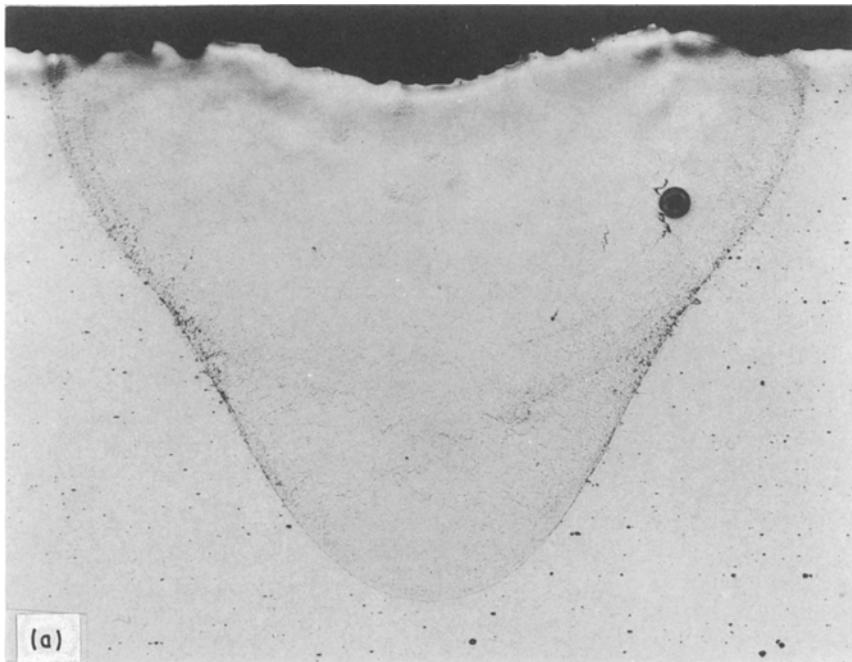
Transverse sections of bead-on-plate weld profiles, $\times 40$.
